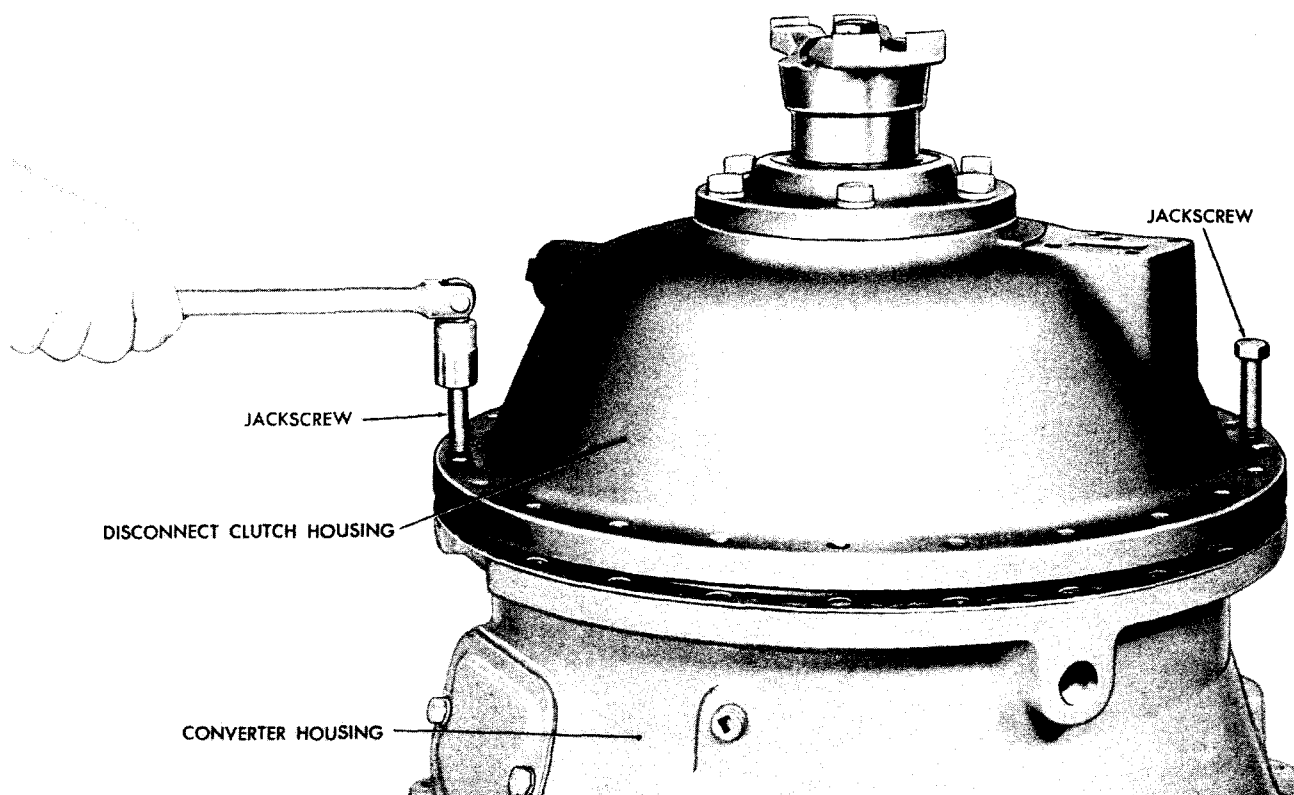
Using jackscrews to remove disconnect clutch assembly
